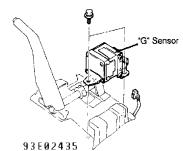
Locating "G" Sensor Courtesy of Mitsubishi Motor Sales of America.
